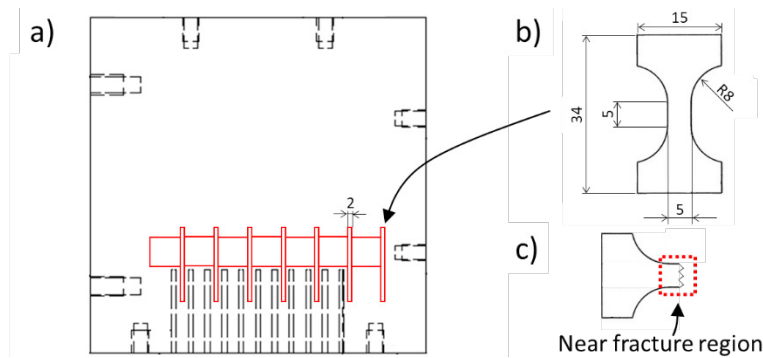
a) test sample; b) tensile specimen (thickness is 2 mm); c) near fracture region for observation with microscope
